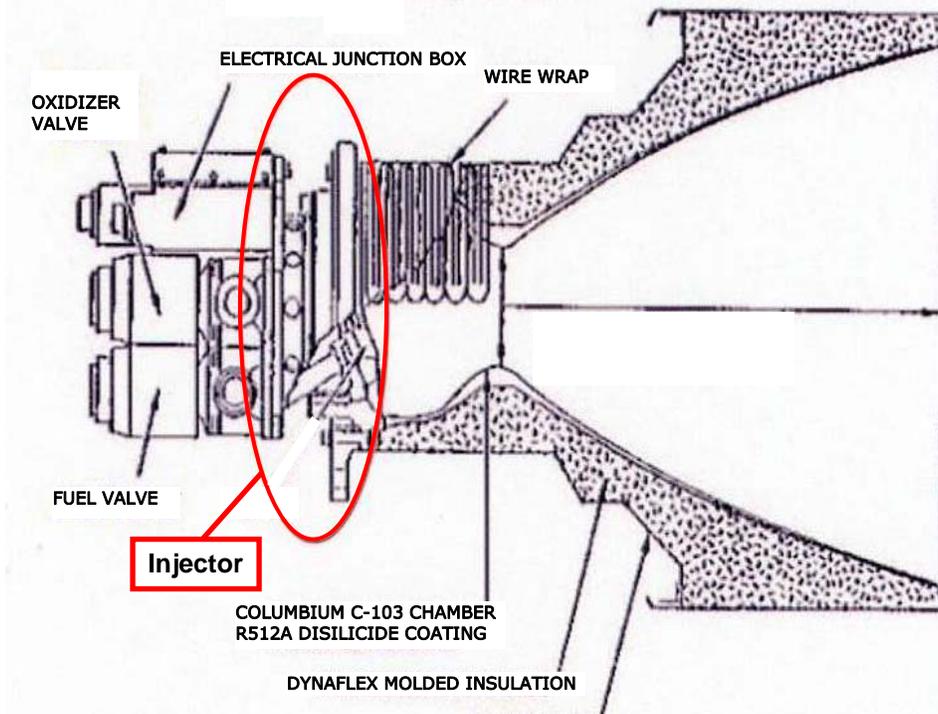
RCS thruster cutaway showing major components: valve module, injector, and nozzle. Enlarged view of circled portion shown in Figure 3.
